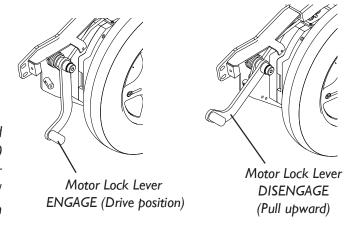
DISENGAGING/ENGAGING MOTOR LOCK LEVERS - GB MOTORS
